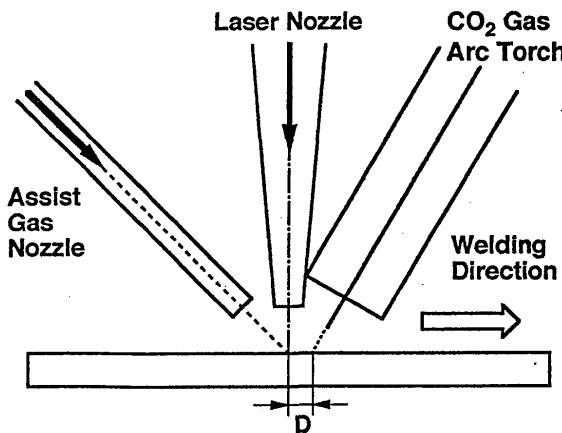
Experimental configuration of an assist gas nozzle, a shield gas nozzle for laser and a CO₂ gas arc welding torch.
